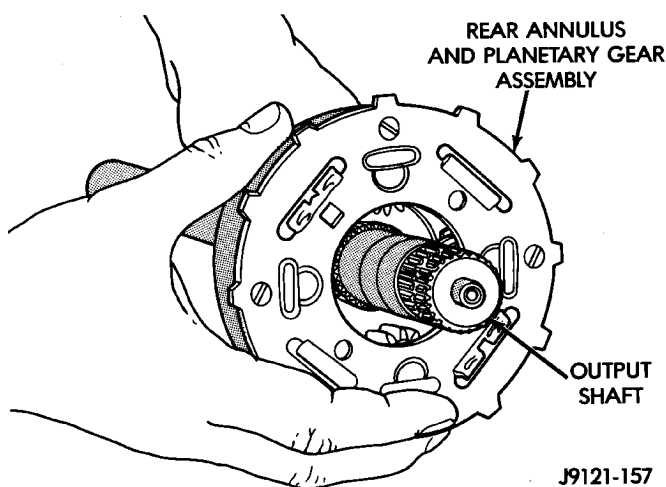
Installing Rear Annulus And Planetary On Output Shaft
